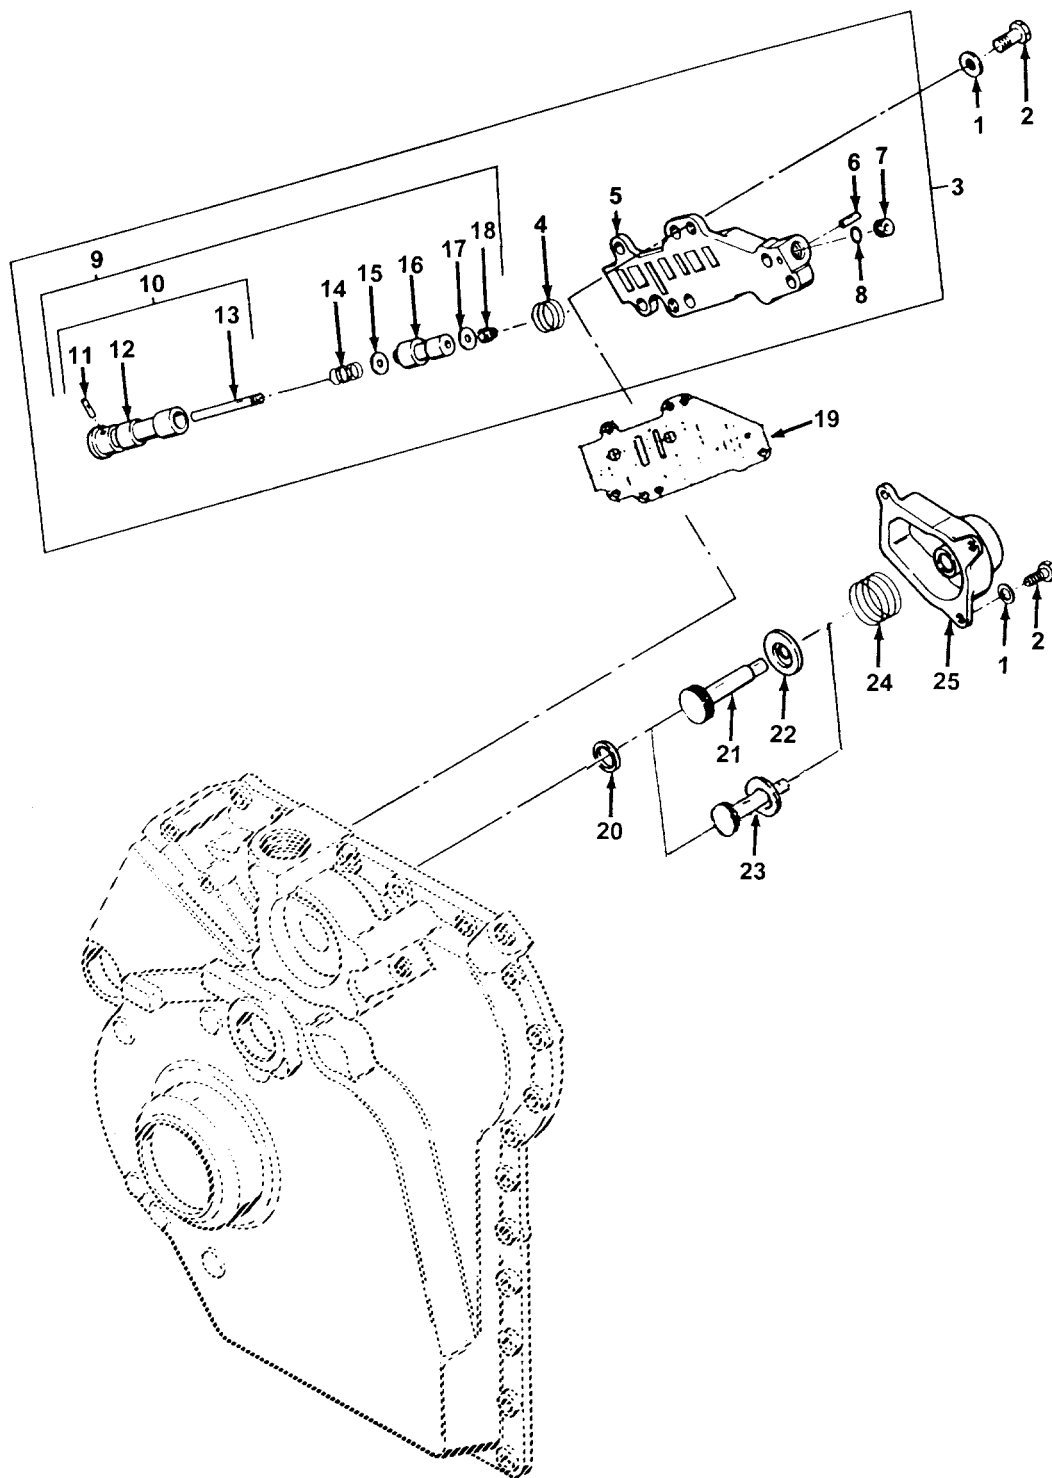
Right Brake Apply Valve Body and Brake Coolant Valve Body.
